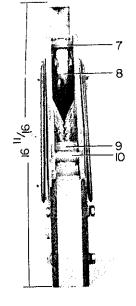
Current Trip Assembly MS-9 Solenoid Mechanism
